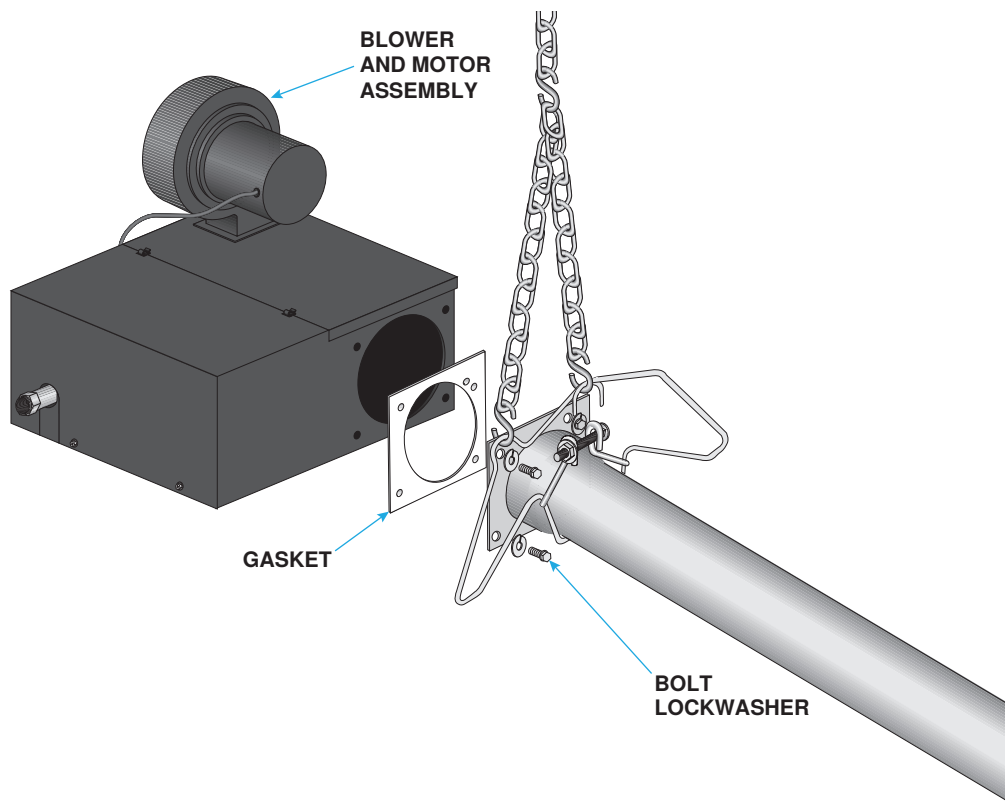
Burner Cabinet and Tube Assembly Connection (Model VZ Shown)
